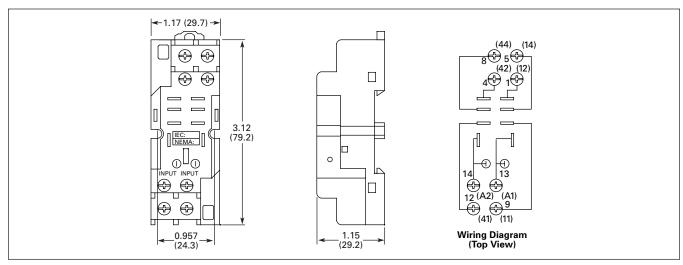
D7PAA — Approximate Dimensions in Inches (mm)
